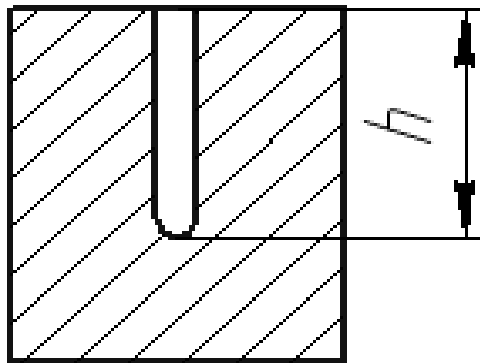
Schematic layout of a vapor-gas channel in the liquid metal in electron beam welding
